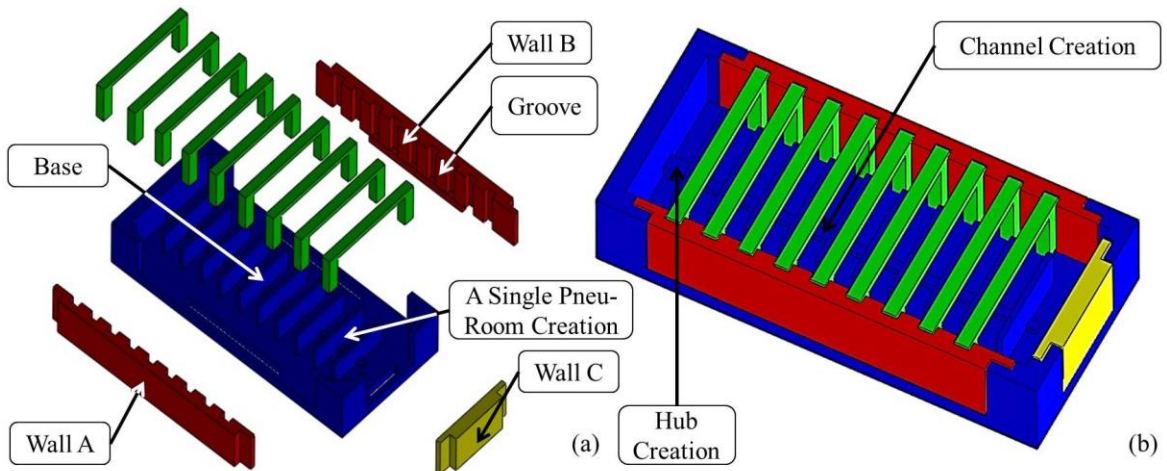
3D Mold V3a for Extension Mechanism V3, (a) Exploded View; (b) Assembly View
